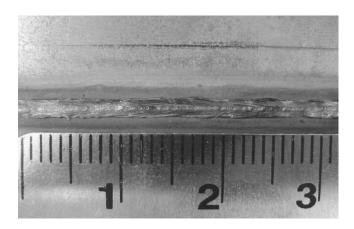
Surface appearance of a diode laser lap weld on 1.0 mm galvannealed steel sheets (GA45–45g/m² zinc coating) precoated with 70 μ m thickness of Al by cold spray before welding. Welding speed was 0.7 m/min.
